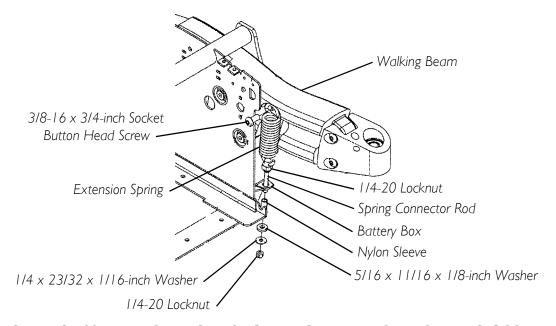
REMOVING/INSTALLING THE FRONT SPRING ASSEMBLY
